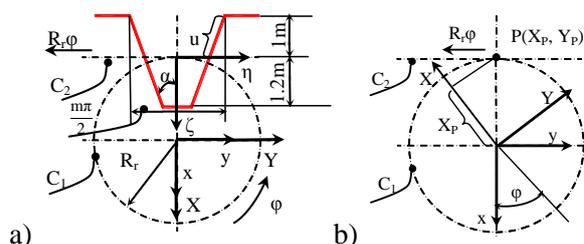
a) The generation of rotor front view profile; b) Gearing pole coordinates, in XY system
